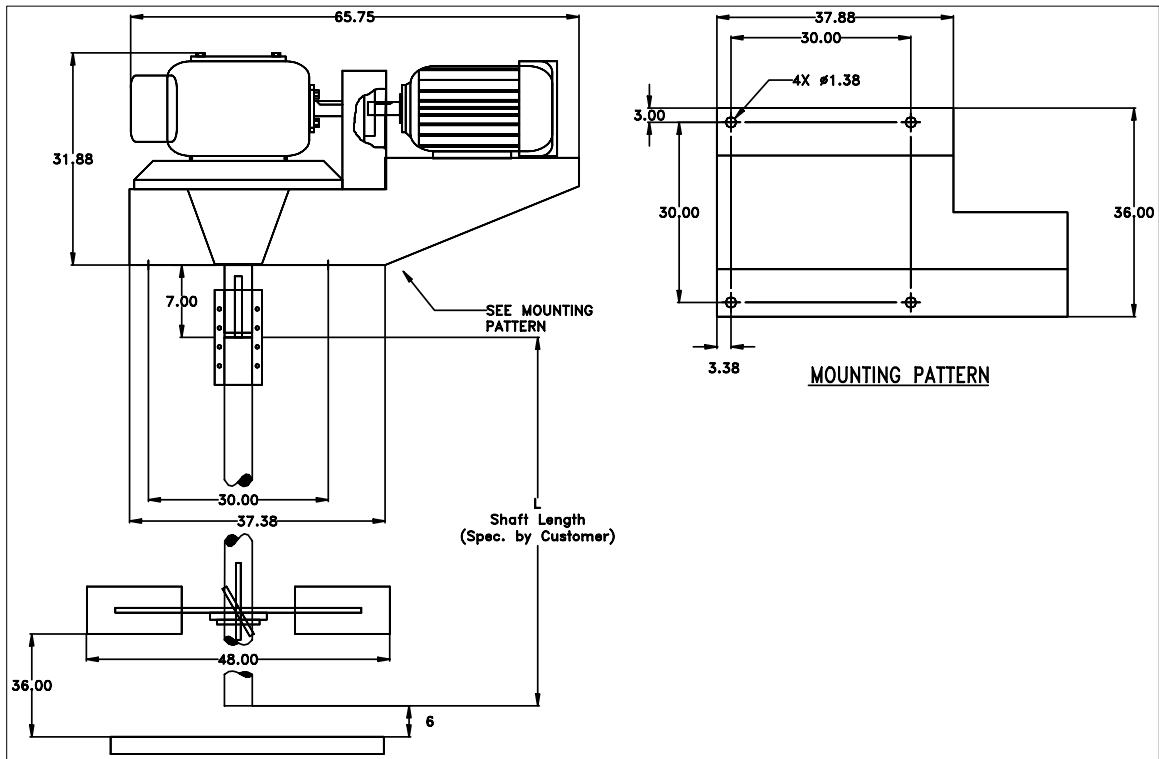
DIMENSIONAL DRAWING MA-25
